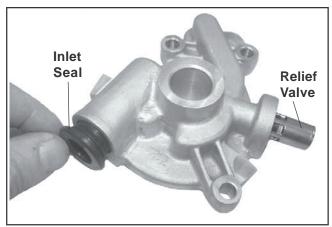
Installing Inlet Seal in Oil Pump Housing.
